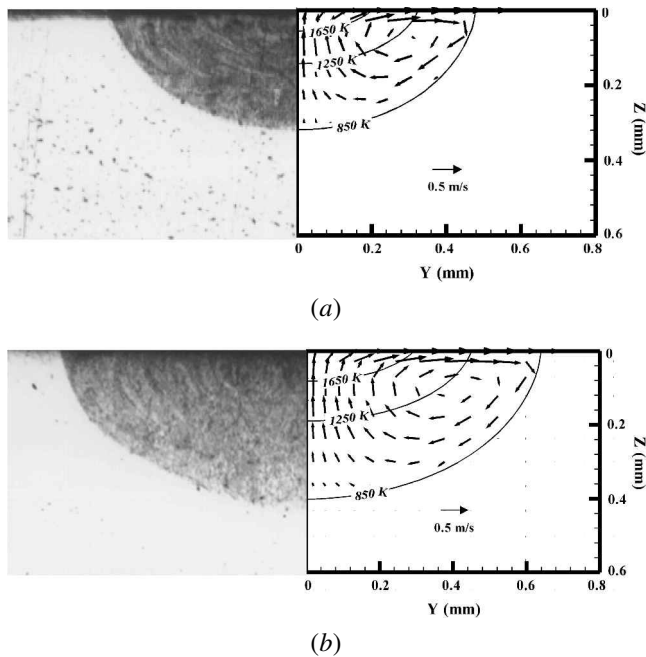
Experimental and calculated weld pool cross sections for laser power of (a) 1.5 kW and (b) 3.0 kW. Welding speed 105.8 mm/s and beam defocusing +1.5 mm.
